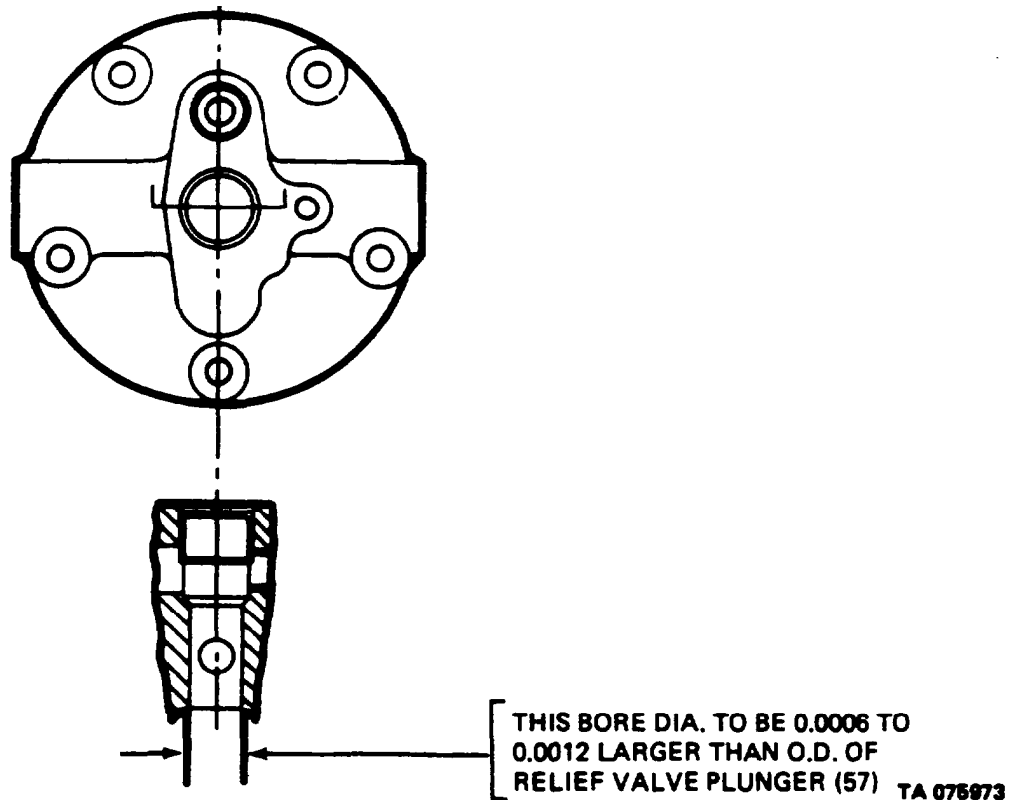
High Pressure Relief Valve Tolerance.
